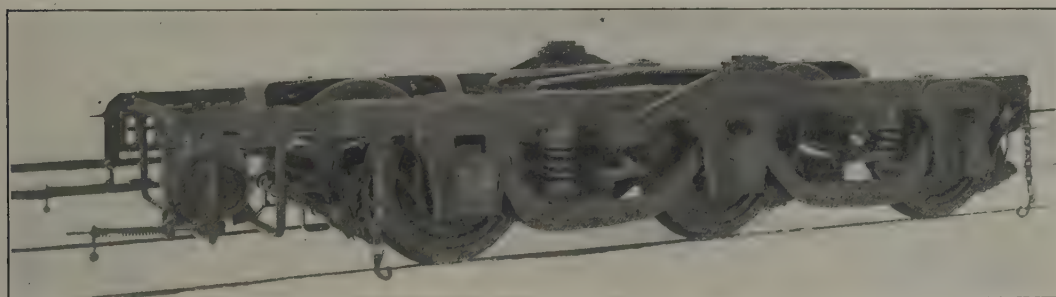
Six-Wheel Truck with Commonwealth Cast Steel Frame. The Harlan Works of the Bethlehem Ship Building Corporation.
